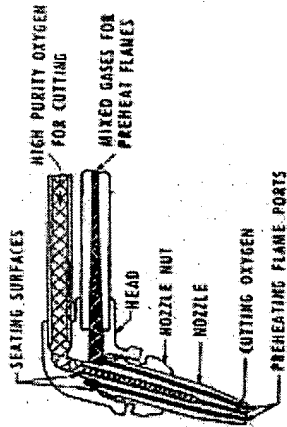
Clasup of torch head and nozzle showing preheating flame ports.
